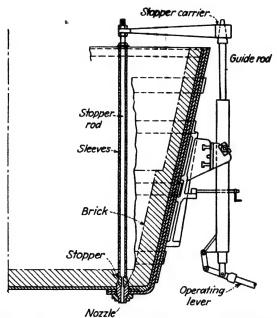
Cross section through a bottom-pour teeming ladle.
